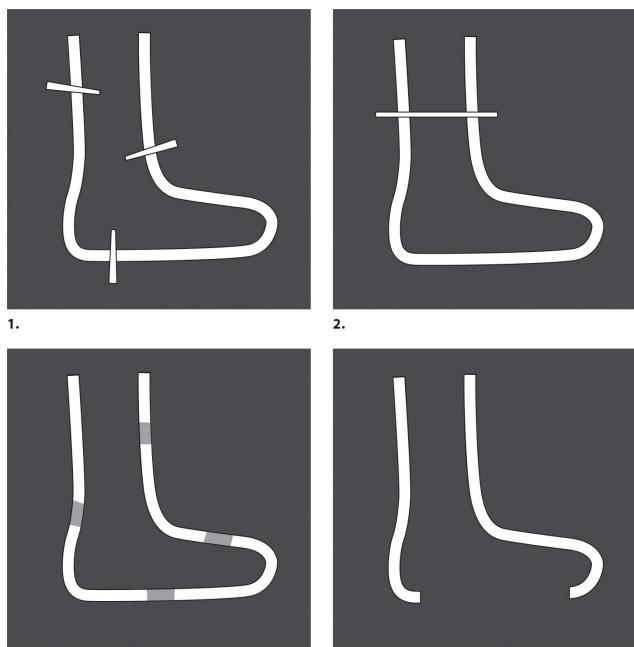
Four types of core supports used to hold the core in place during the pour: 1) core pins; 2) transverse core pin; 3) chaplets; 4) mold extension.
